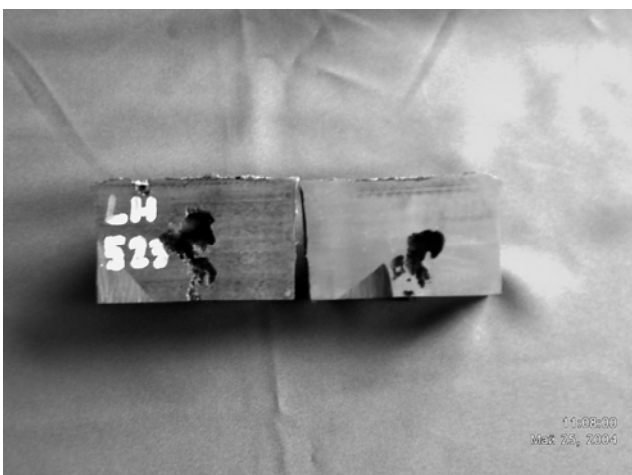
Mode and location of the blind riser provoked by metal shrinkage during hardening.
